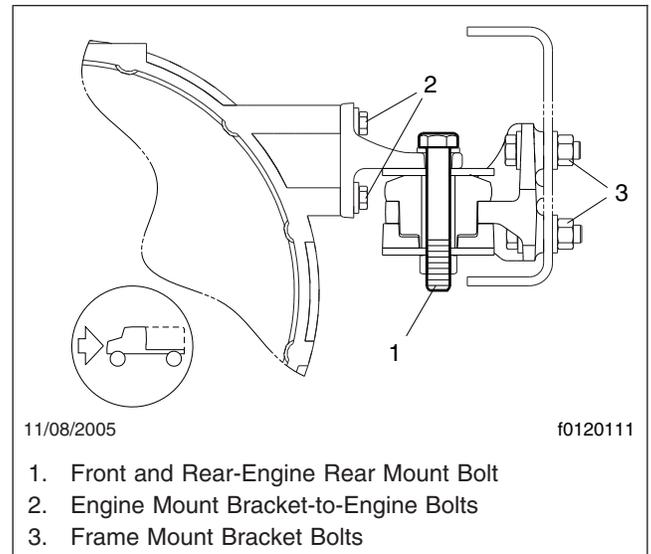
, Front and Rear-Engine Rear Mount (ISB chassis built after 2002)
